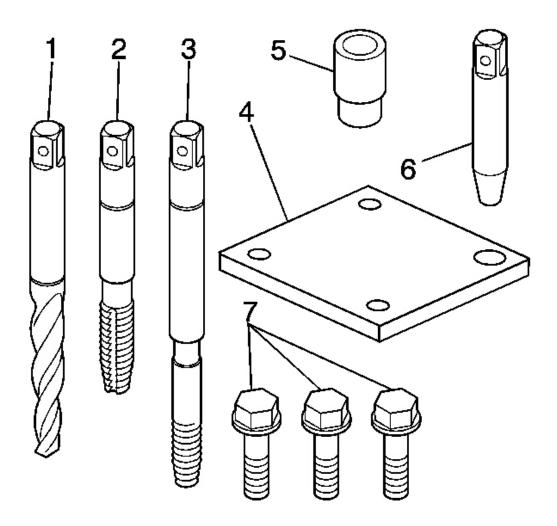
View Of Crankshaft Main Bearing Bolt Hole Required Tools
